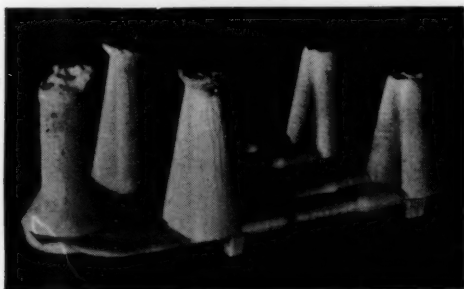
METHOD OF GATING TENSION TEST SPECIMEN.
